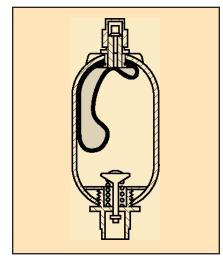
Pressure fluid in uncharged accumulator, could crush bladder or extrude it into gas valve and puncture it.
